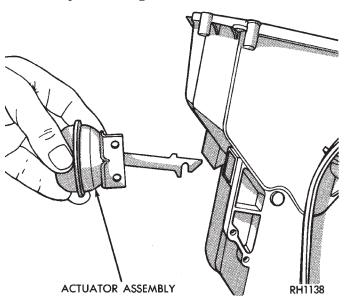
Removing or Installing Heat/Defrost Vacuum Actuator Assembly
